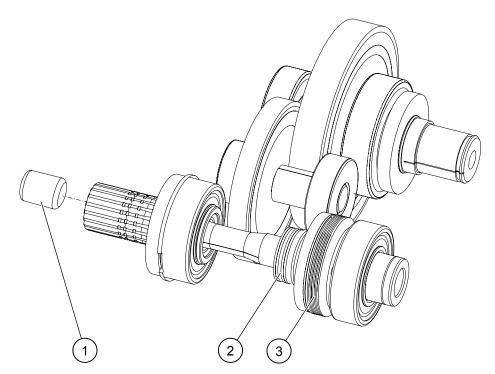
Slipping clutch construction with one torque limiter disc, SL05
